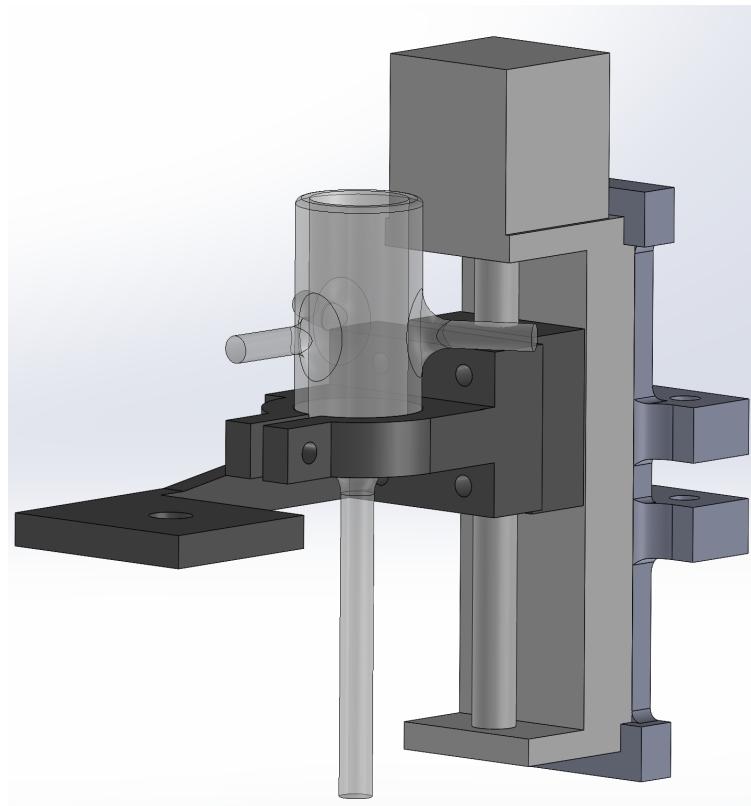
Z-axis assembly with mounting bracket and plasma torch/camera mount.
